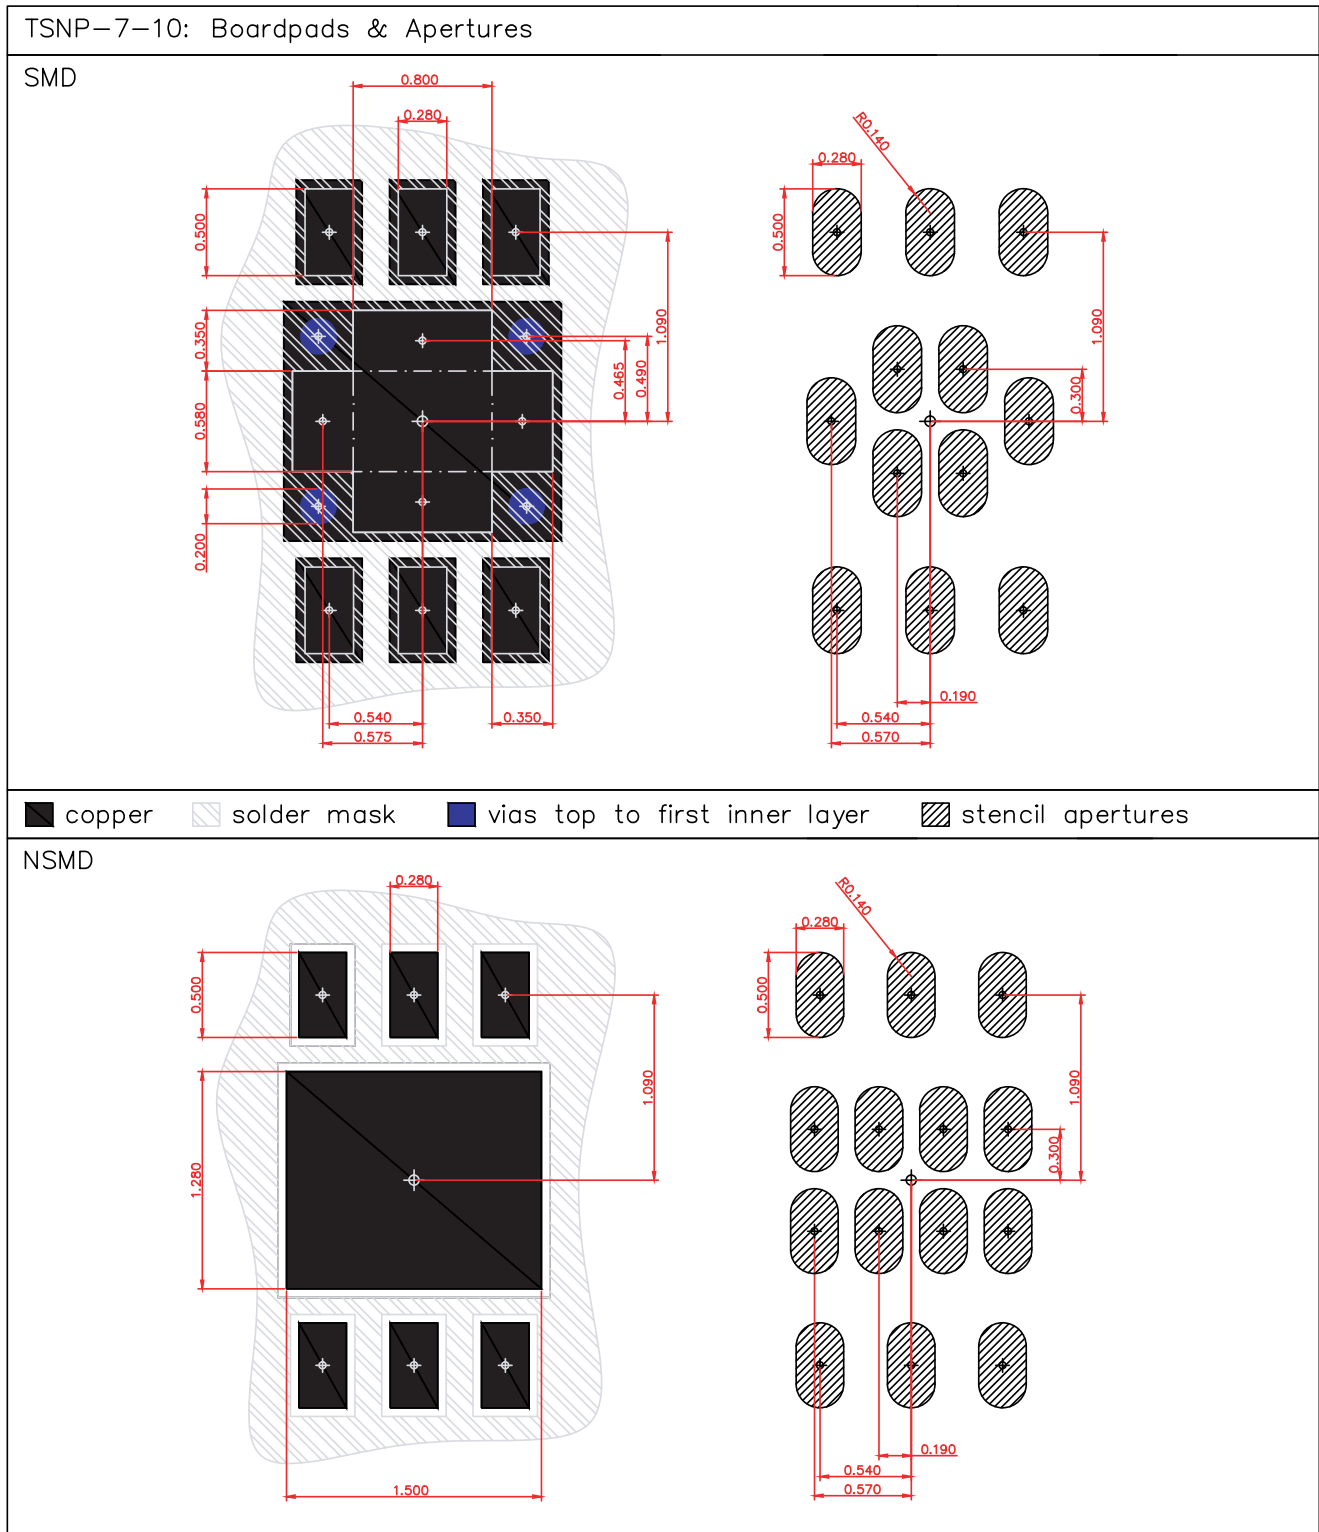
Recommended PCB Footprint for the TSNP-7-10 Package (subject to be changed)
